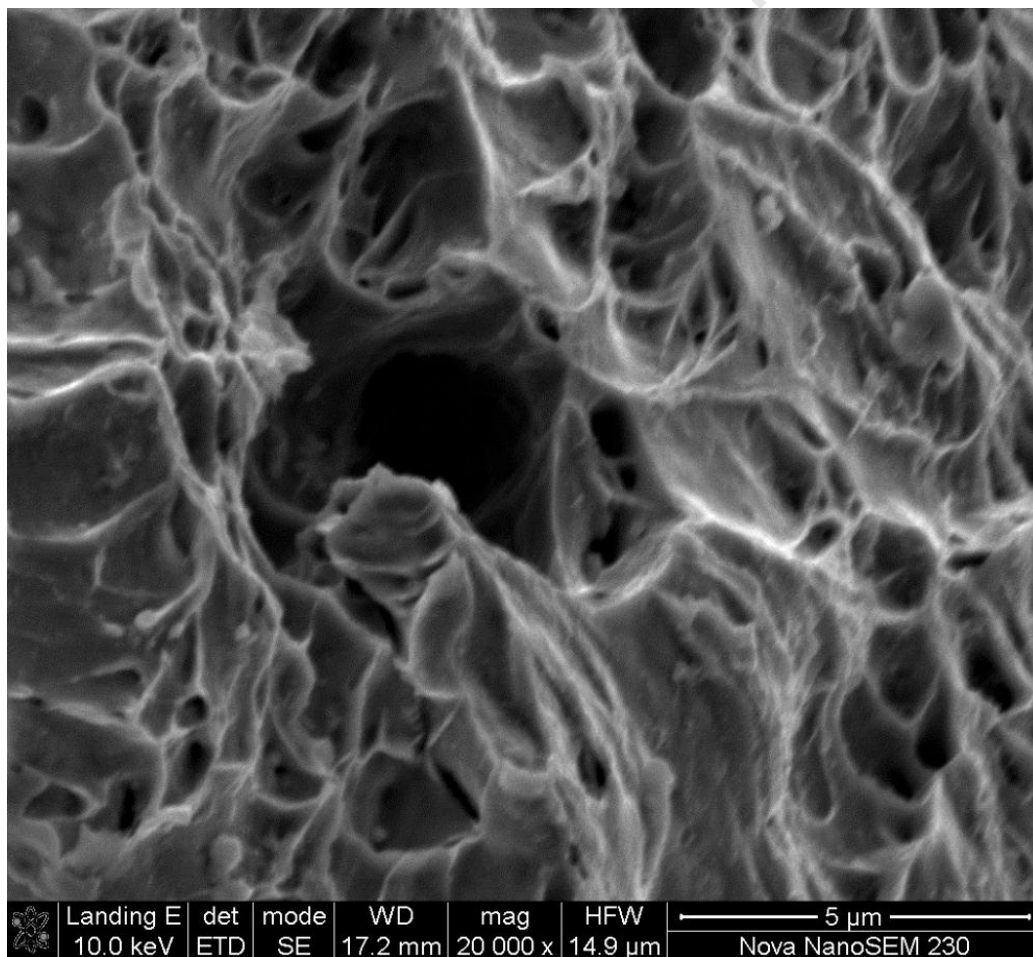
Fractograph of front plate tested at a charge mass of 33g, ( $I=63.7$  Ns), shows equiaxed dimples (uniaxial tensile failure)
